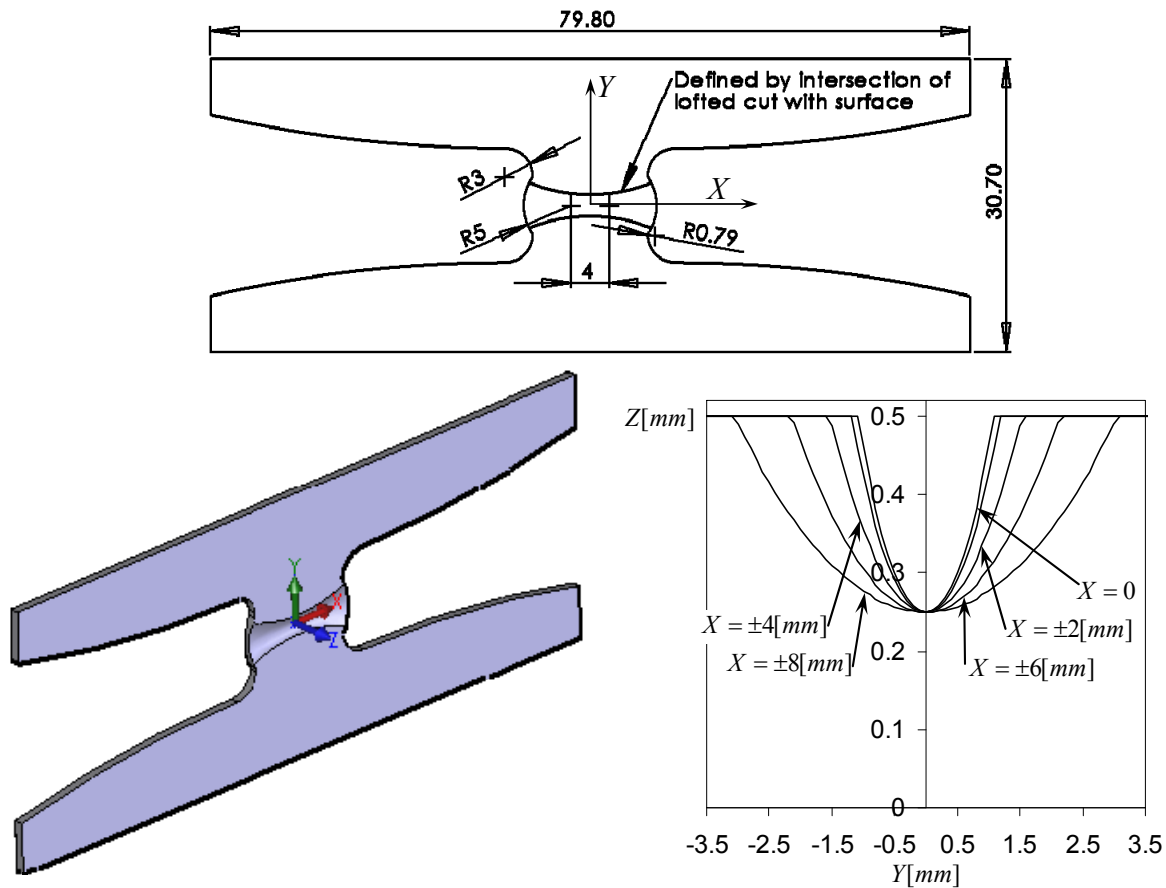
Geometry of the butterfly specimen with the coordinate system and origin indicated (top and bottom left) and the lofting lines defining the gage section (bottom right).
